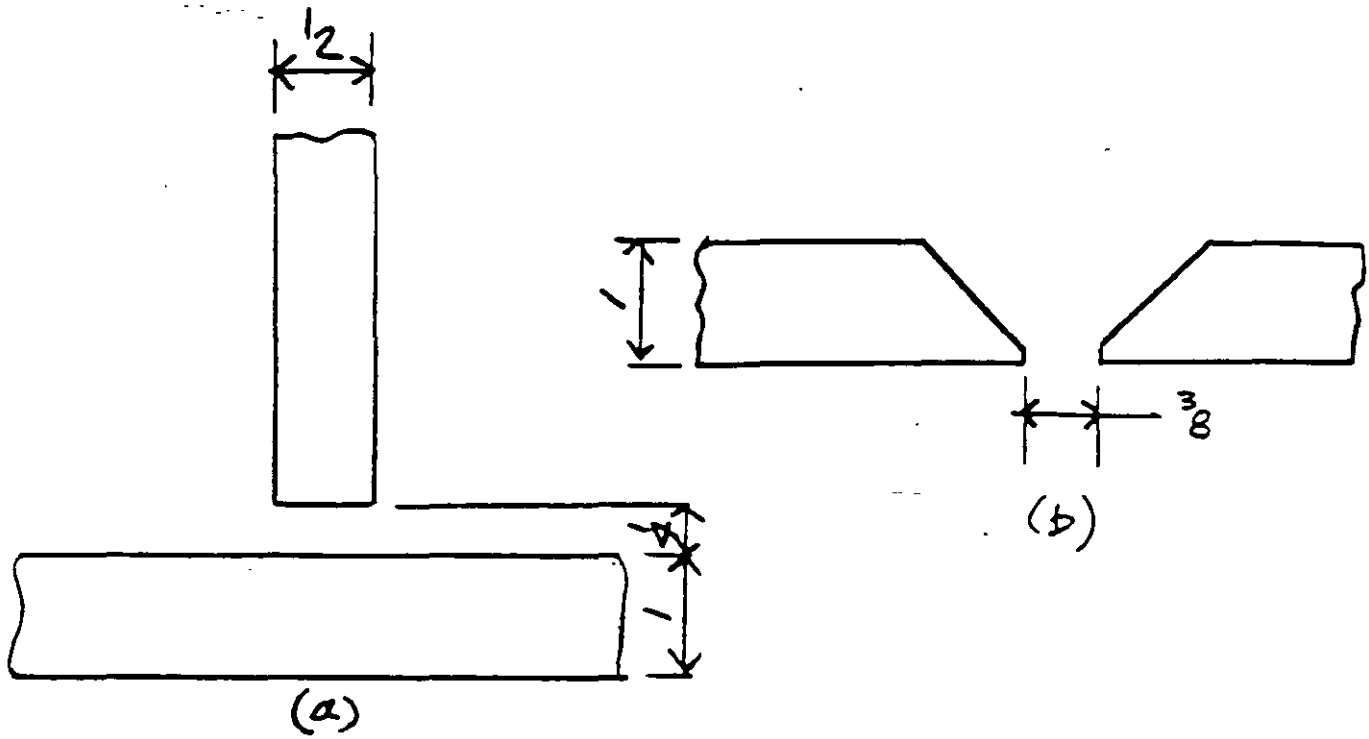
Excessive root opening: (a) fillet weld, (b) groove weld
